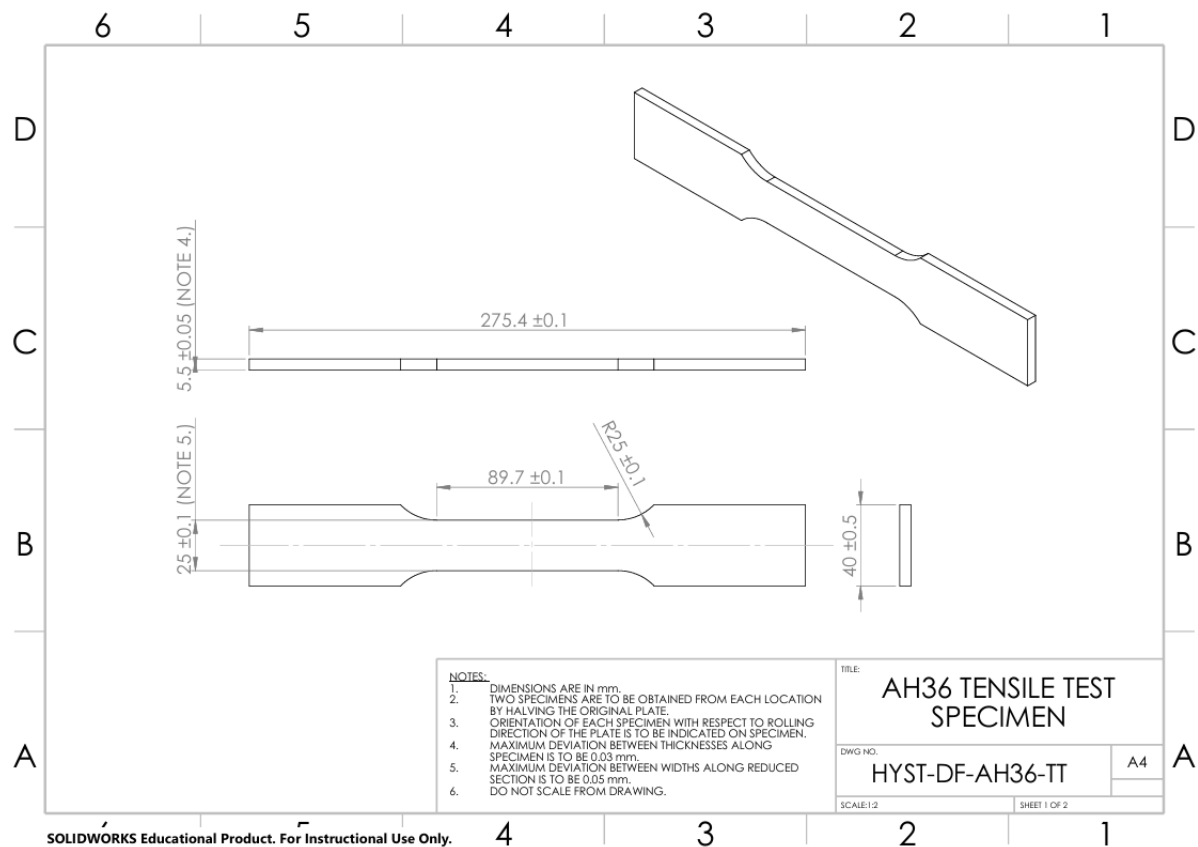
Dimensional drawing of the experimental tensile test specimen used for both AH36 and S690QL steels [26].
